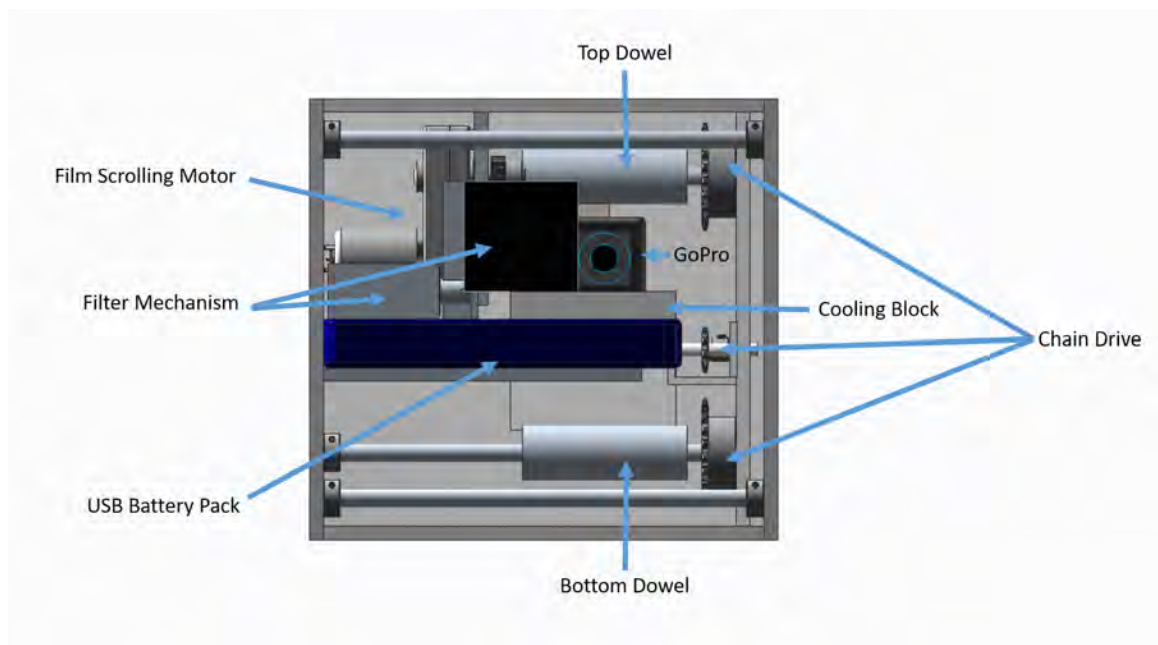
Head on view with heat shield and front wall removed. [CREO Rendering]
